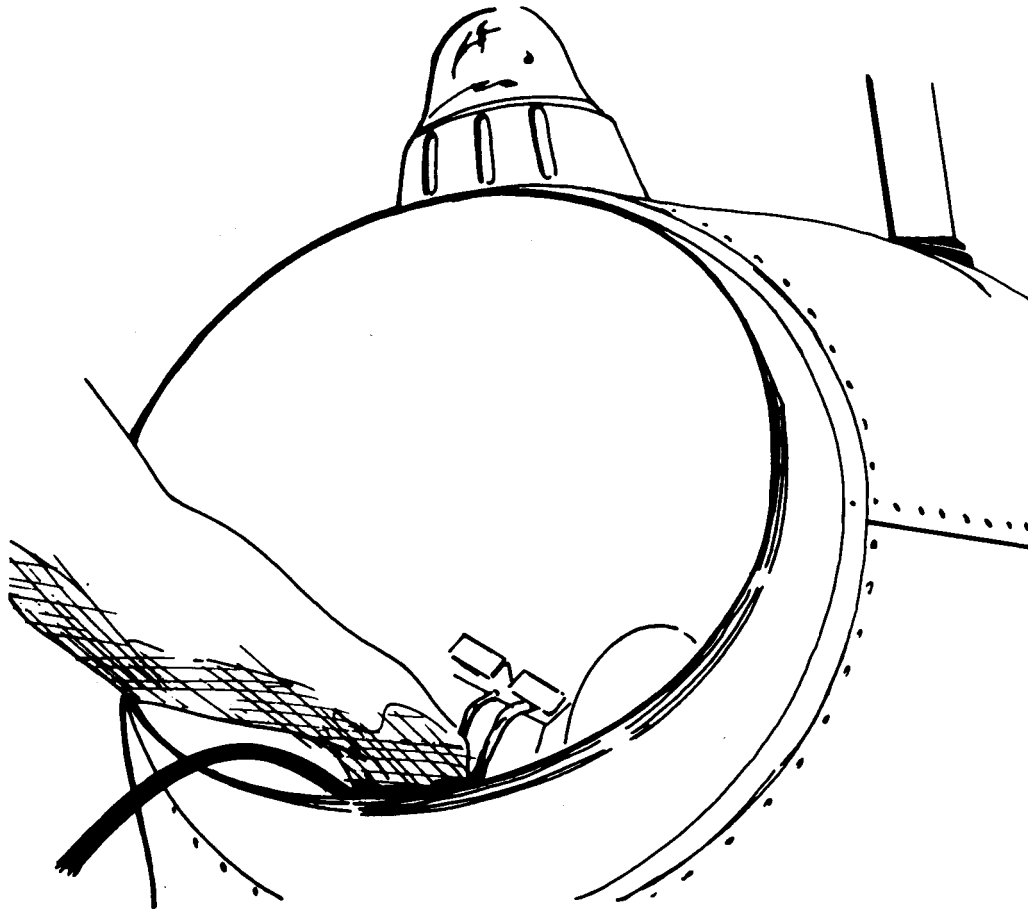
Installation of Heater Probes in Engine (Sheet 2 of 2)
